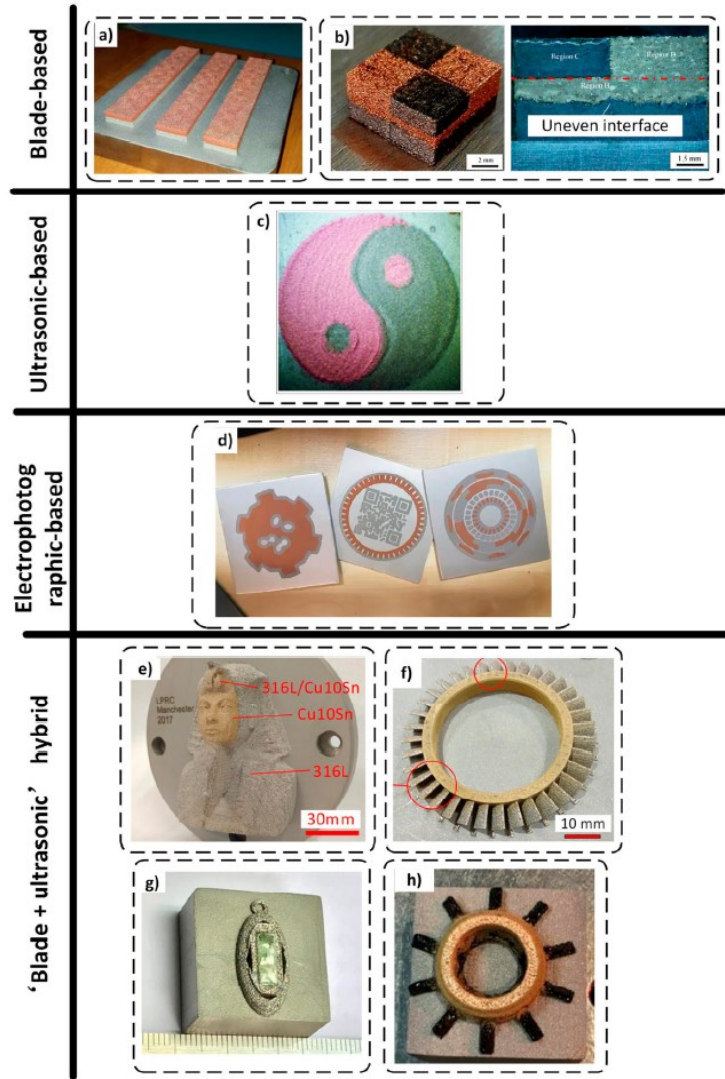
Examples of multi-material manufacturing using the L-PBF process [77].
